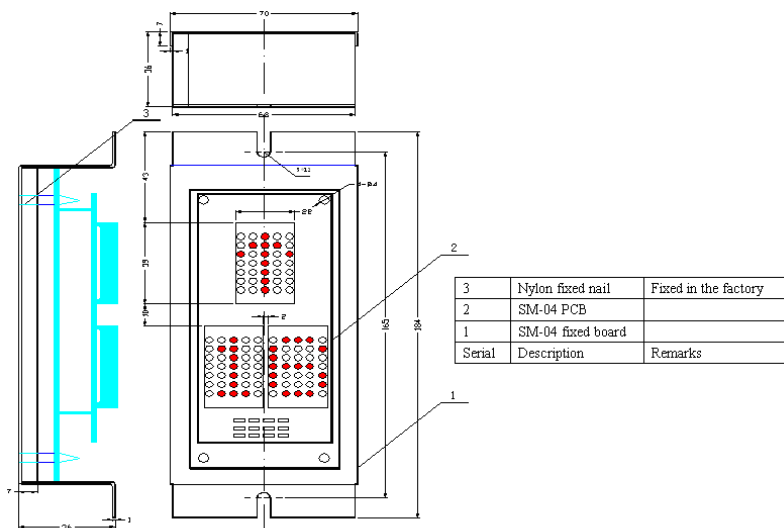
Mounting Dimensions of SM-04-VHL
